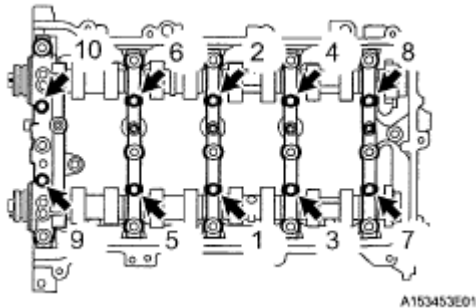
Identifying Camshaft Bearing Bolt Tighten Sequence
